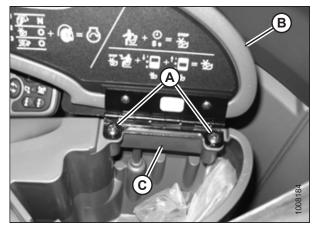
Support Position on Console – S6 and T6 Series Combines
